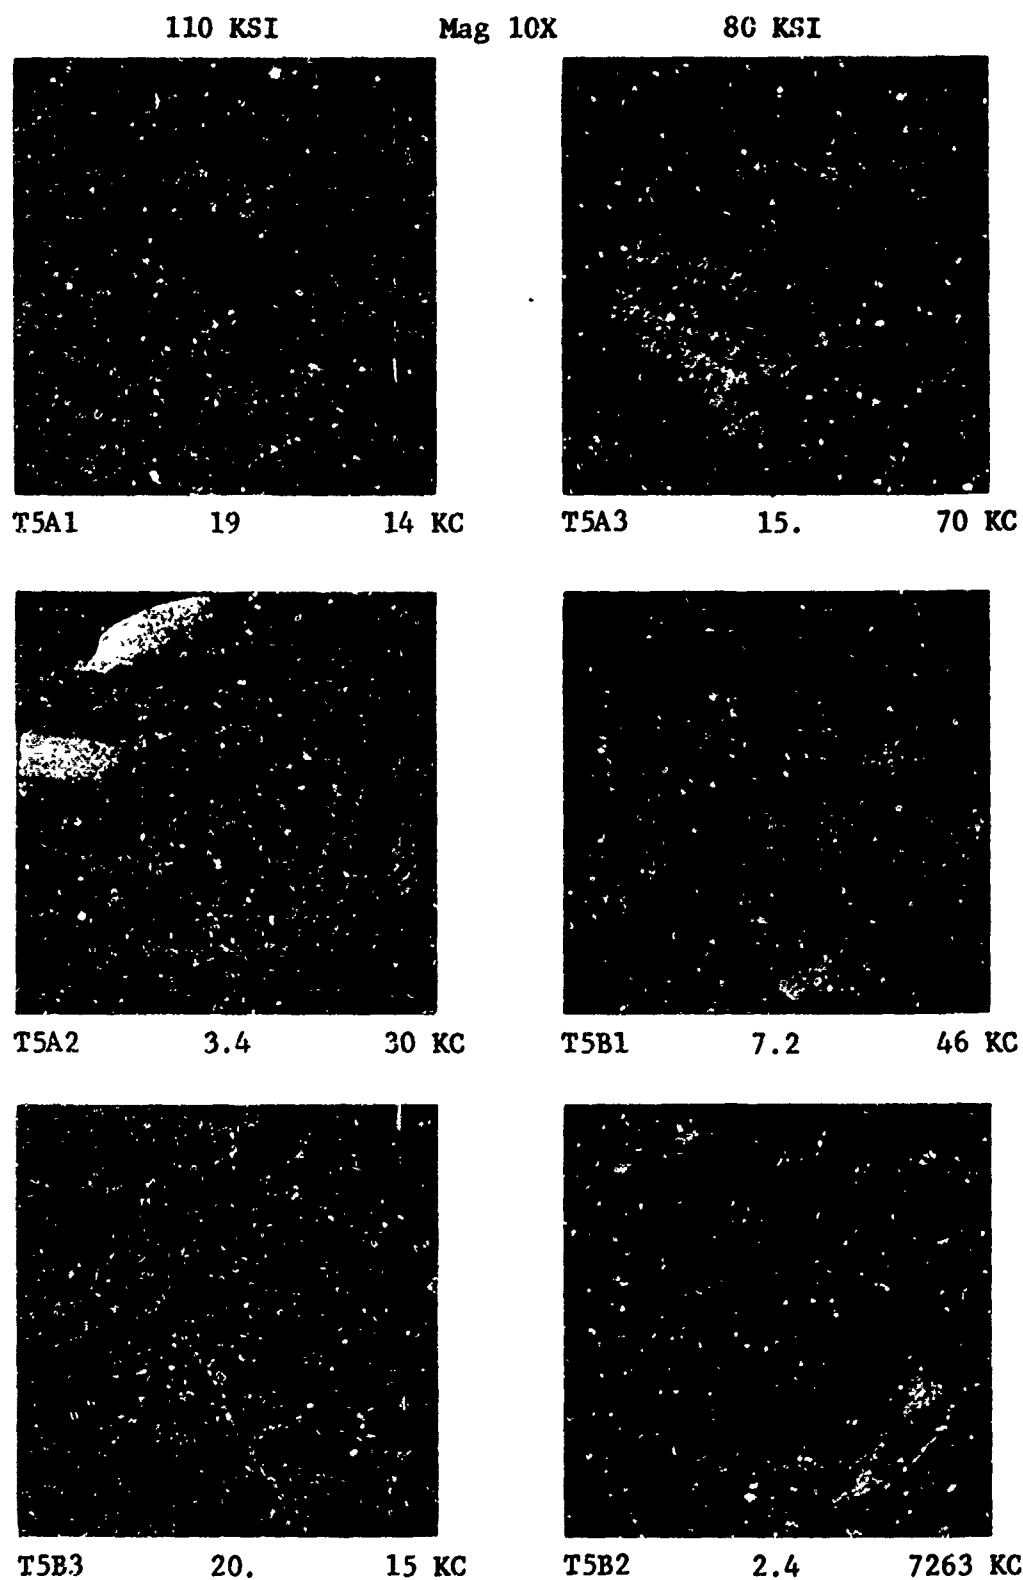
Fracture Surfaces of Failed Fatigue Specimens Series T5-
